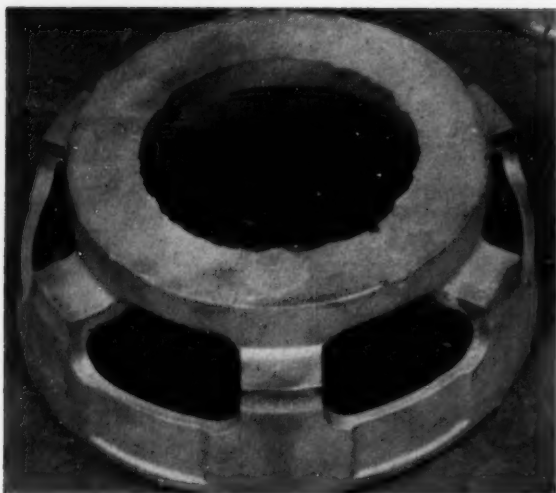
Made of 410 stainless steel, this part was also formerly an investment casting. Shell molding cut production costs by 70 per cent.
